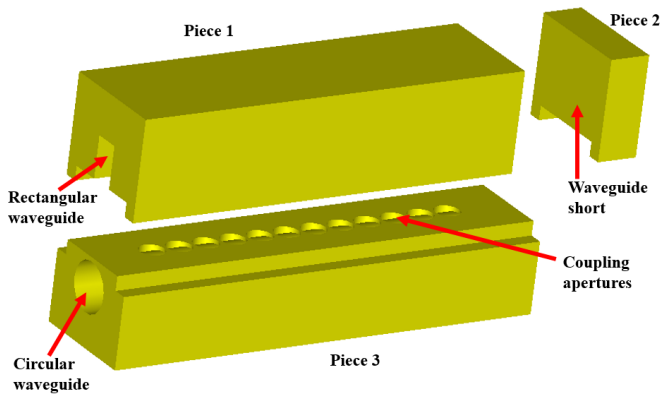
3D drawing and assembly of the multiple-hole coupler.
